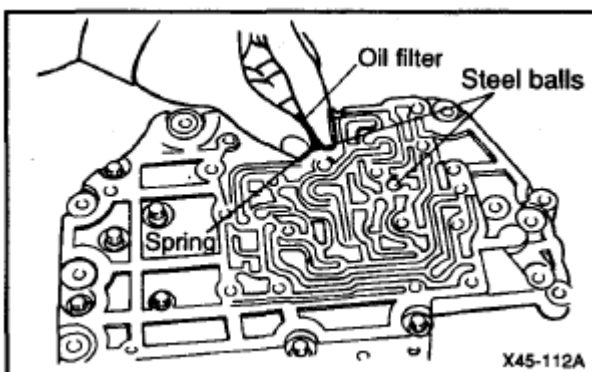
Identifying Spring, Oil Filter, & Steel Balls On Intermediate Plate
